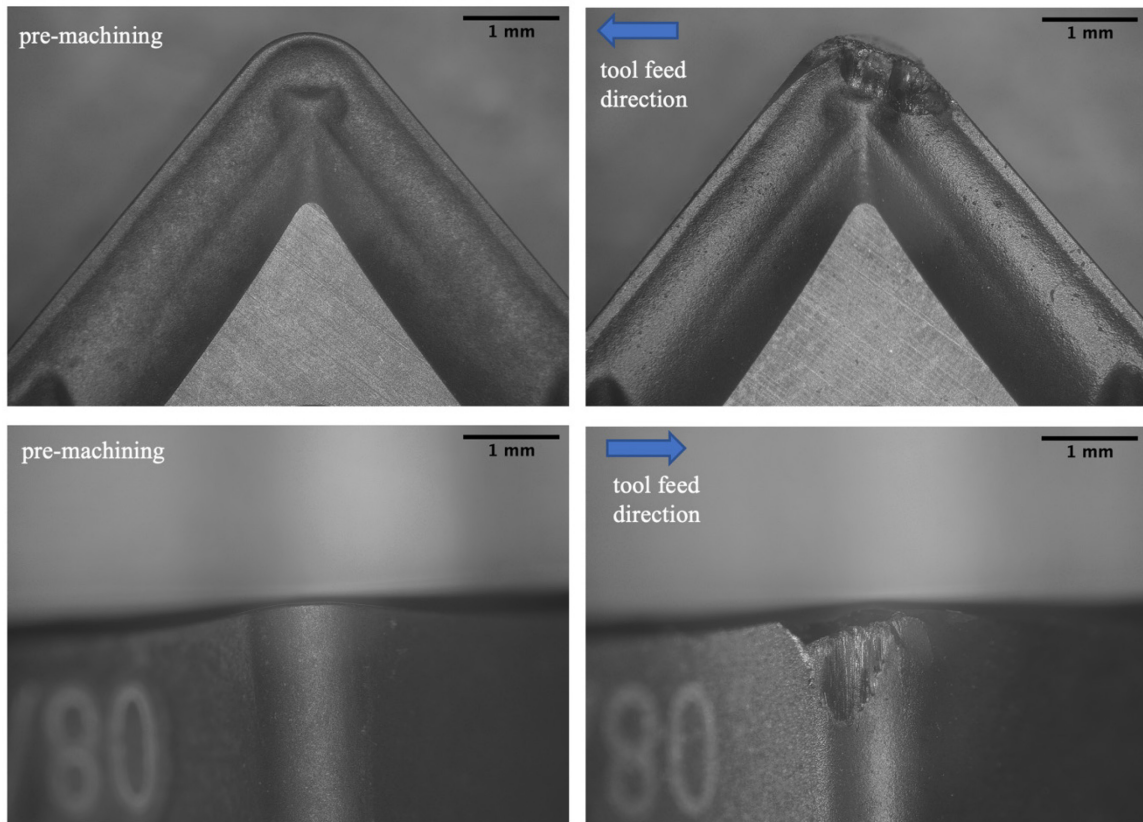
Tool (insert 2C) used during MQL machining. Top-left and bottom-left: new tool, before machining. Top-right and bottom-right: tool after catastrophic failure
